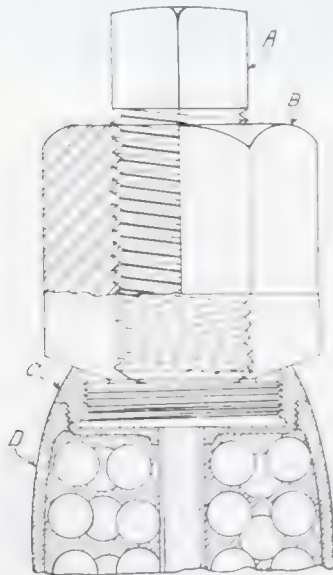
TOOL FOR REMOVING BRASS SOCKETS.
